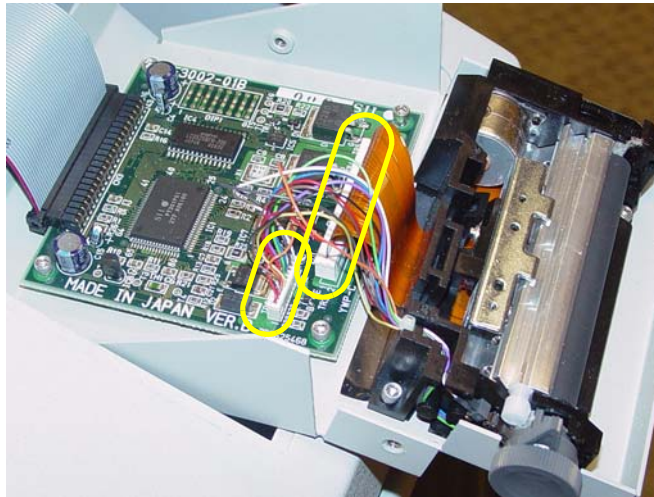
Remove the printer ribbon cable and the printer data cable
